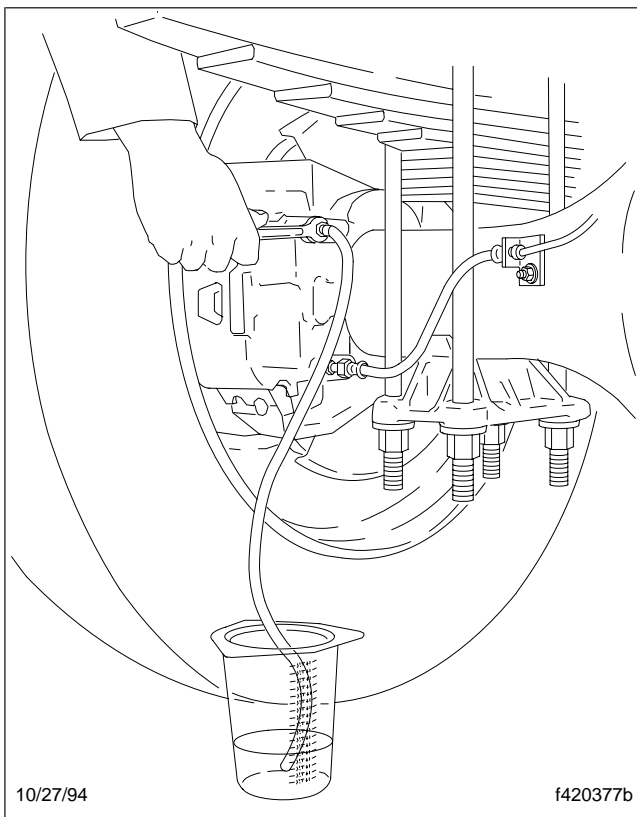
, Bleed the Connections at the Rear Wheel Calipers
